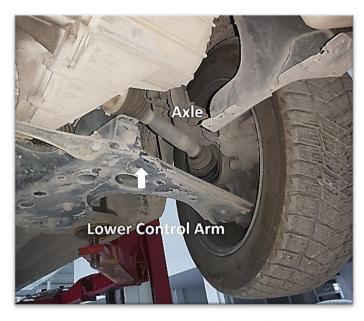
Lower suspension arm, axle, spring, and front wheel connection
